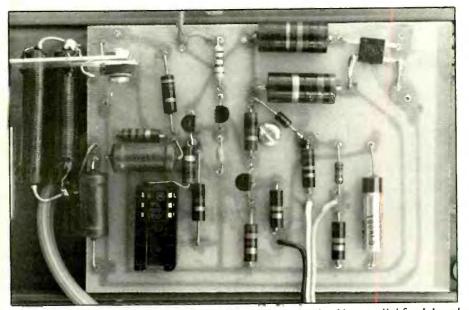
Note in this close-up view how two chokes are wired in parallel for L1 and the L-bracket heat sink used for Q4 (upper-left), use of a 16-pin socket for IC1 (lower-left), and single screw that mounts the board on the box (center).
